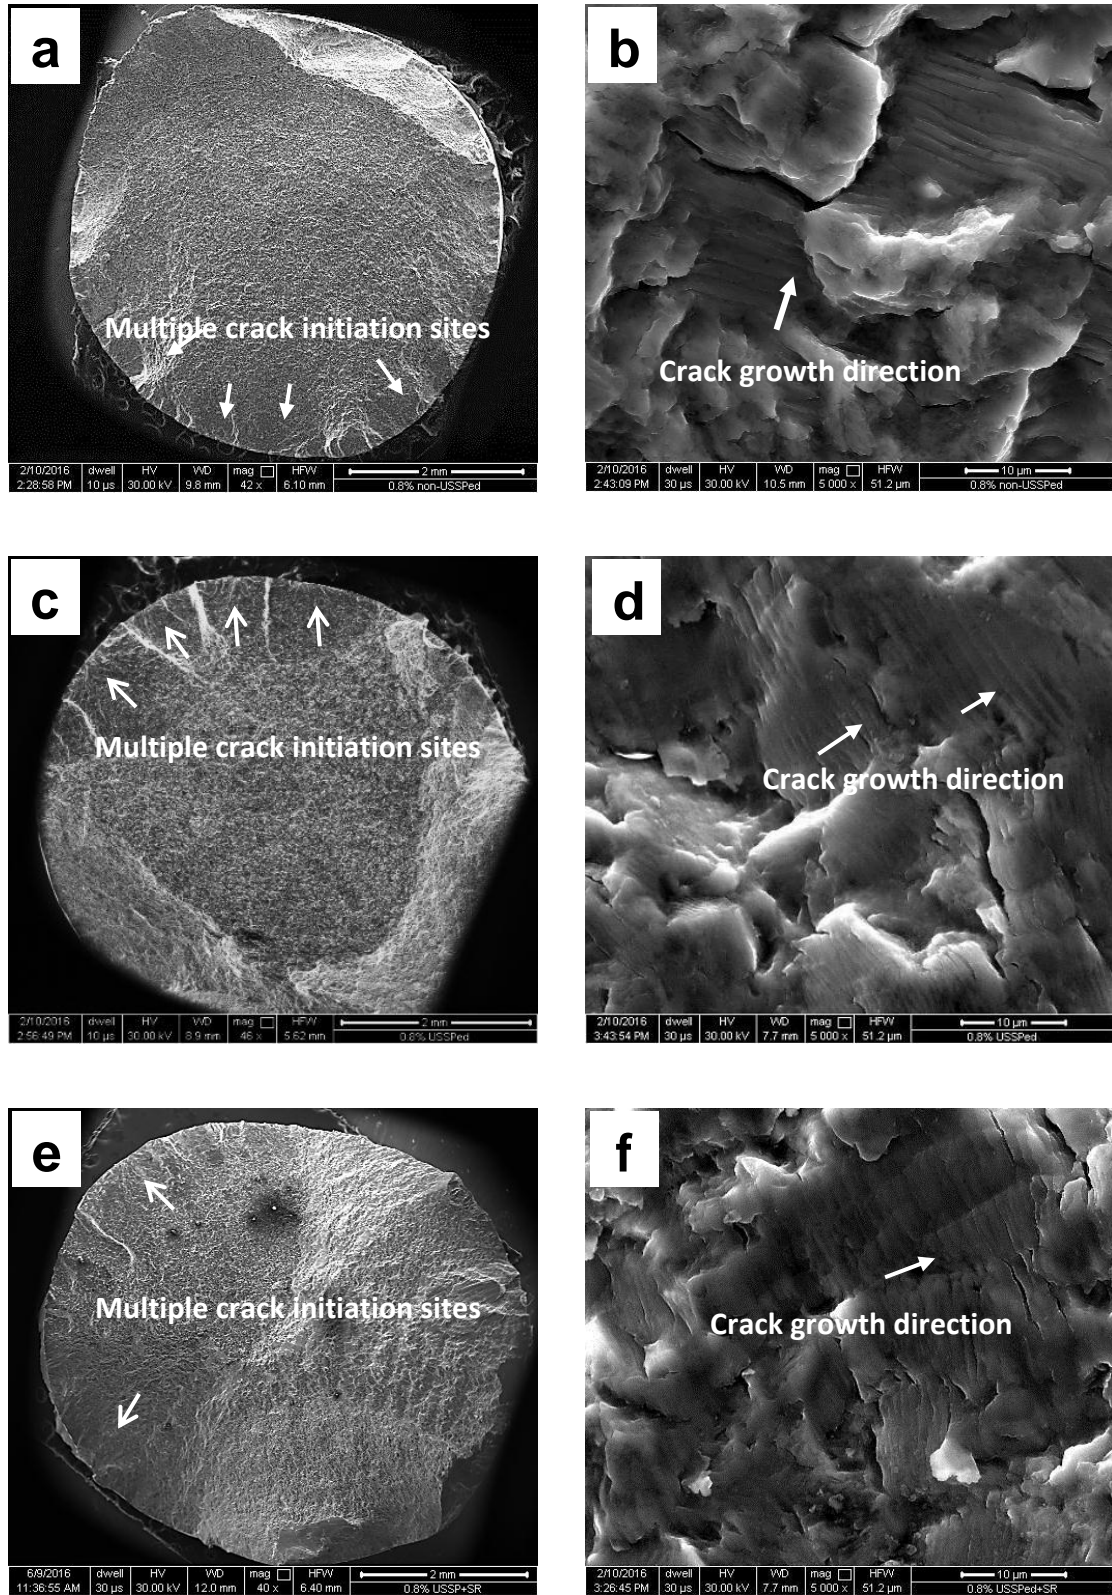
Fractographs showing fracture surfaces of the specimens tested in LCF at $\pm 0.80\%$ strain amplitude: (a, b) non-USSPed, (c, d) USSPed and (e, f) USSPed+SR.
